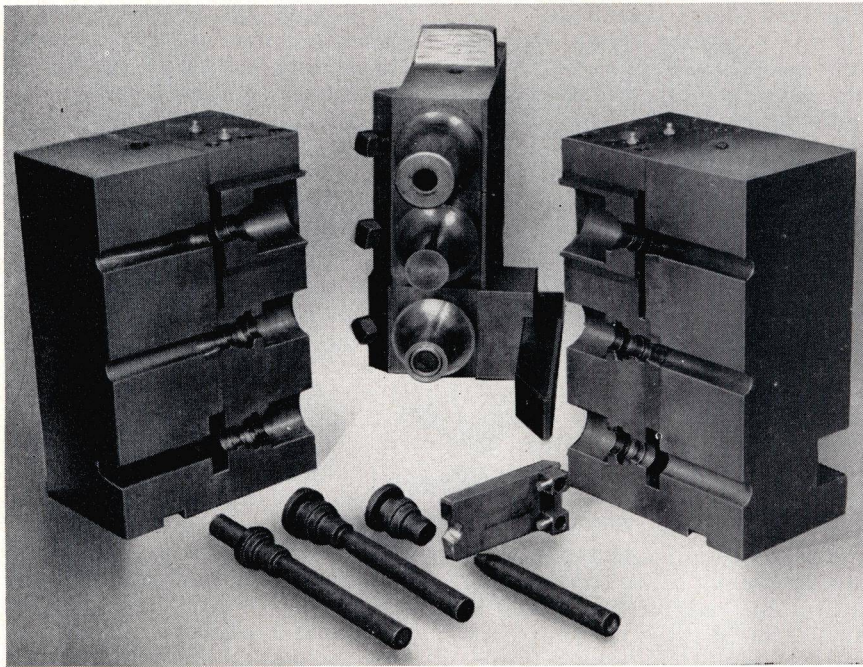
Sliding dies for upsetting automobile cluster gears.
